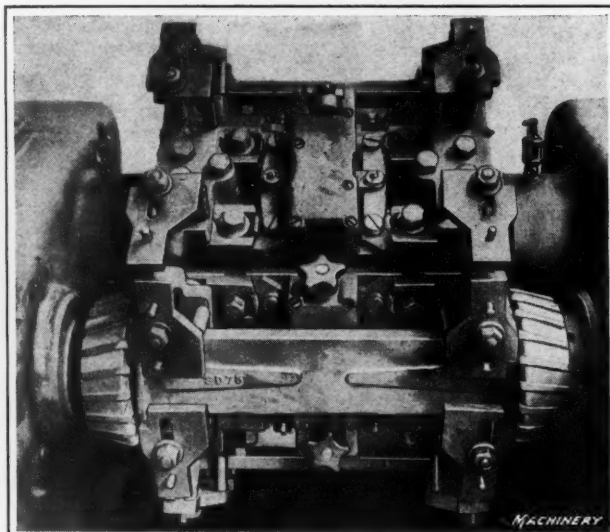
Fixture used in milling Ends of Casting shown in Fig. 6
